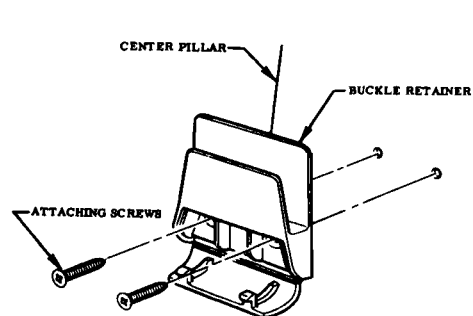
Front Seat Shoulder Strap - "A-80" Styles (Refer to Fig. 15-104)
